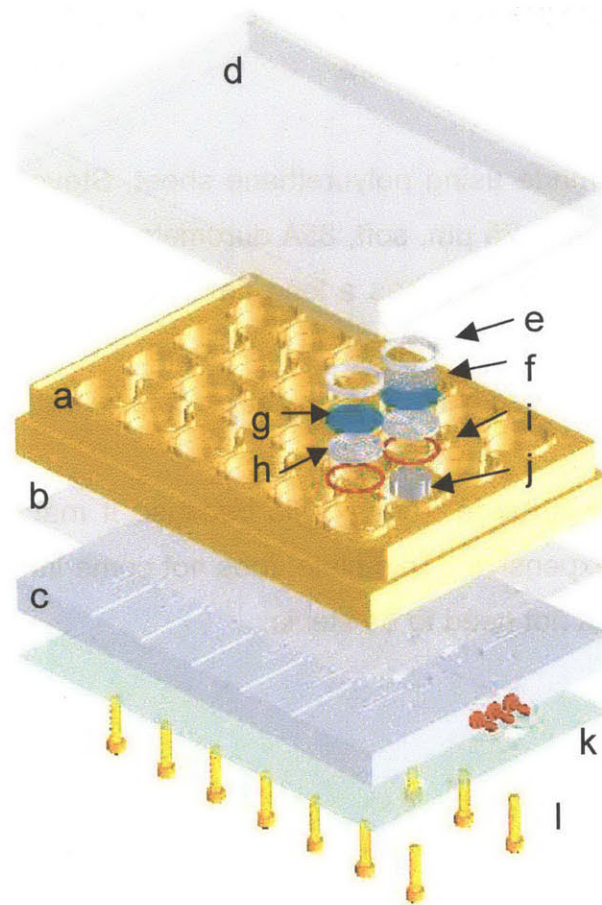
Exploded view of the bioreactor showing all bioreactor materials, manufacturing methods and quantities: a) machined polysulfone fluidic plate; b) punched polyurethane membrane; c) machined acrylic pneumatic plate; d) injection molded polystyrene lid; e) machined PEEK (polyetheretherketone) retaining ring (24); f) scaffolds are either etched silicon or micro-drilled PEEK or polycarbonate (12); g) punched PVDF filter (24); h) machined polysulfone filter support (24); i) silicone o-ring gasket (24); j) machined polysulfone filler (12); k) tape; l) stainless steel screws (14)
